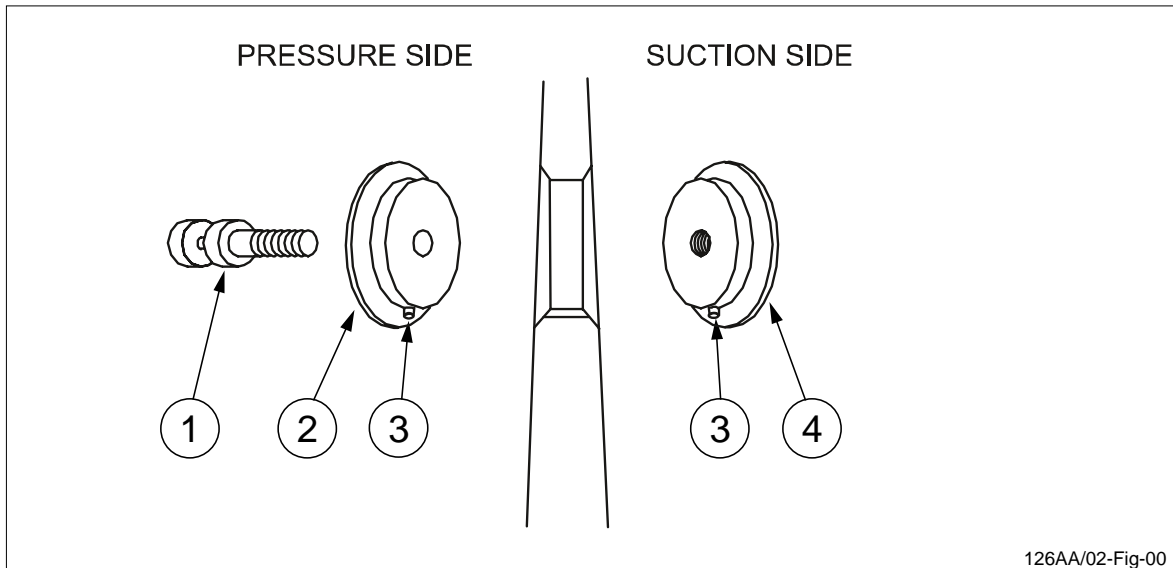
The two plug halves are pre-machined to fit in its propeller blade.
